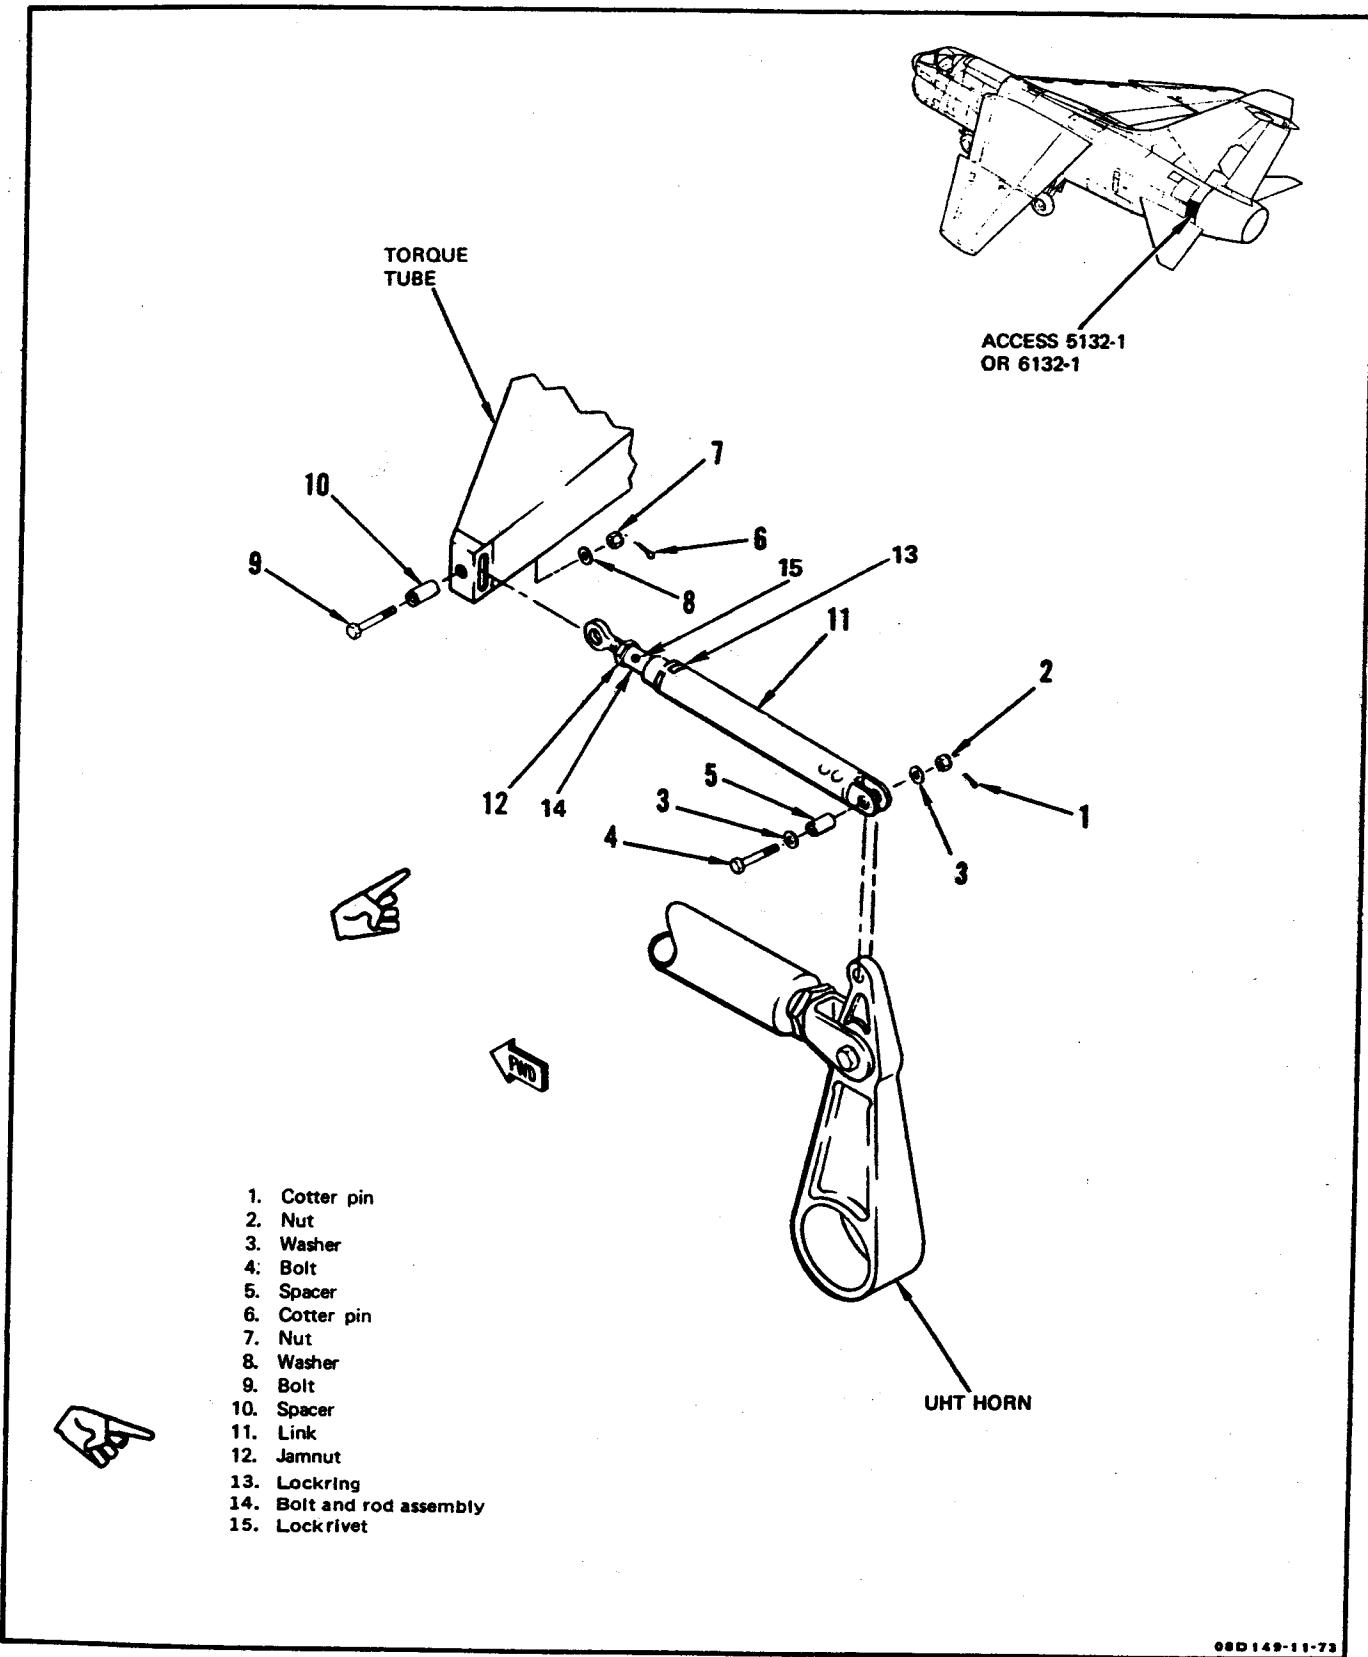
UHT Backup Controls Torque Tube Link Removal and Installation
